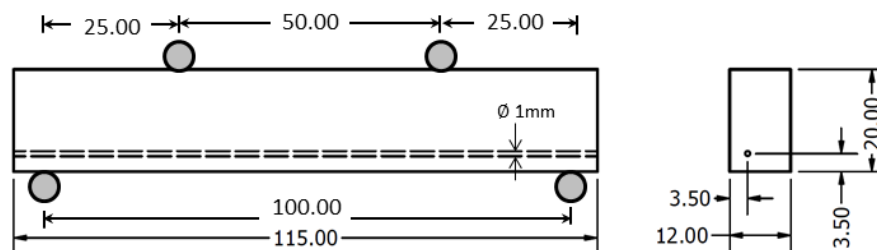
Ti-6Al-4V specimens inside a four-point bending fatigue test setup. Dimensions are in [mm].
